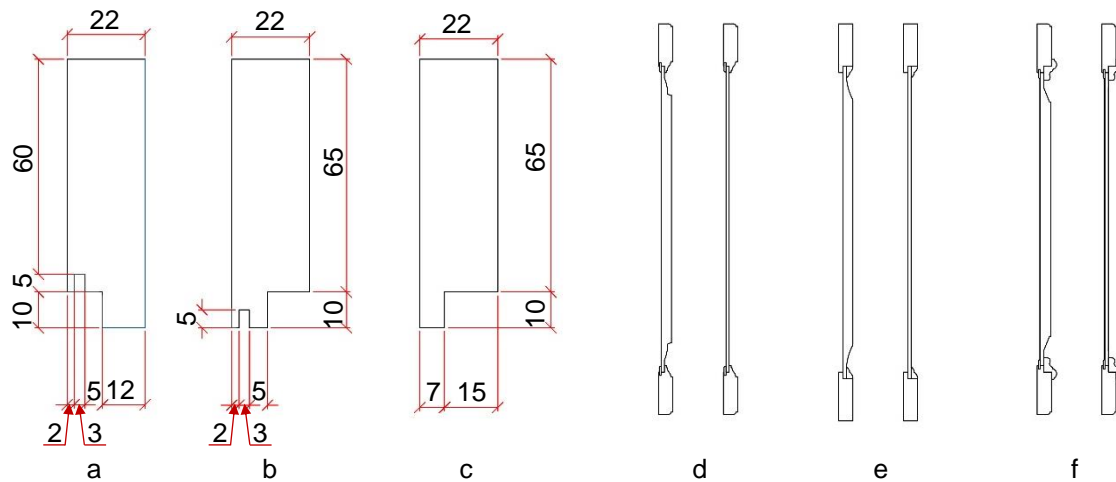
The a, b, c) frame board tongue and groove structure and d, e, f) frame board and core board assembly method
